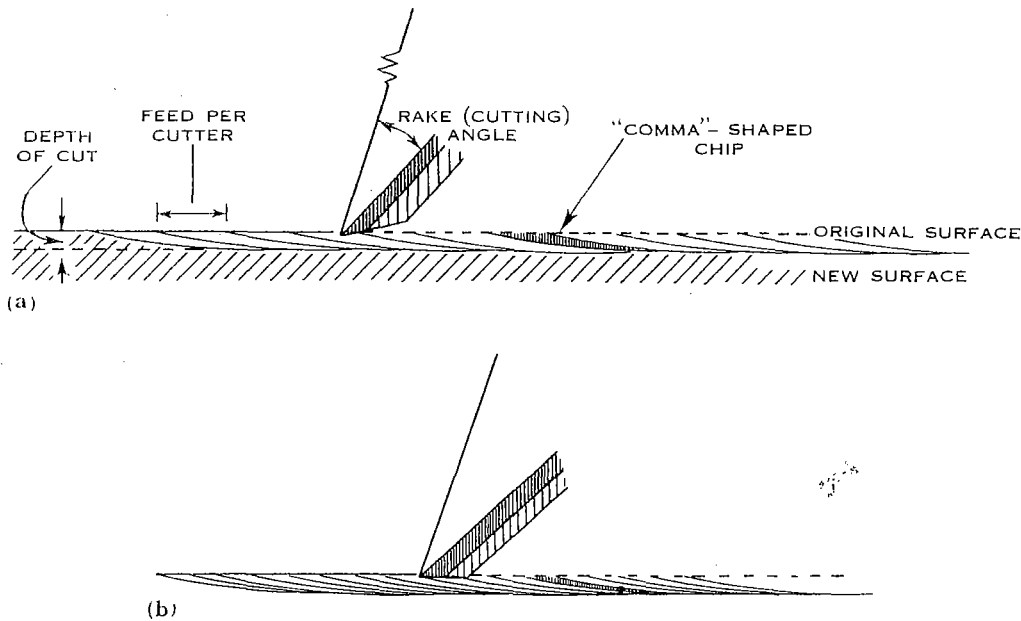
Approximate paths traced out by cutters of a rotary head. Note shape of chips and machined surfaces. The effect on chip and surface shape of halving the feed per cutter is shown by comparing (a) and (b).
